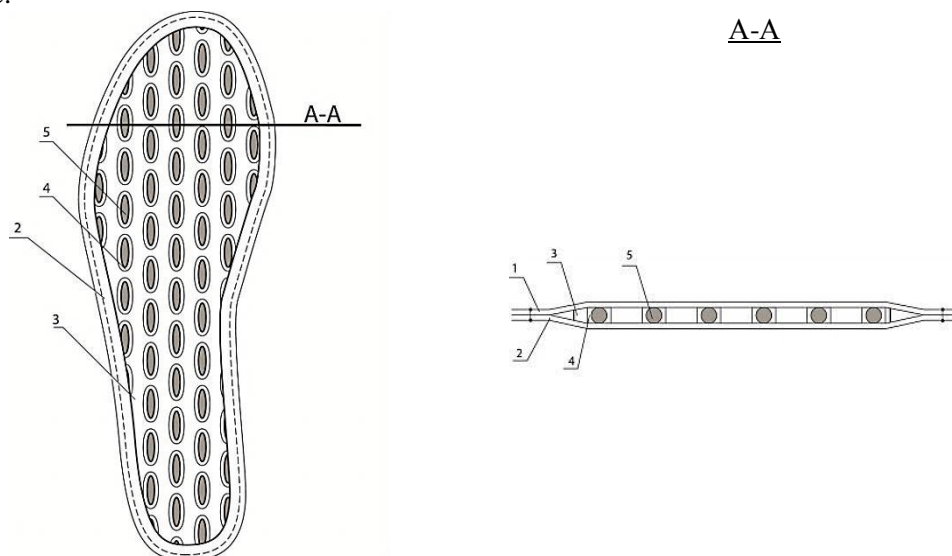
Technical drawing of special purpose insole without top layer with an additional layer with holes
